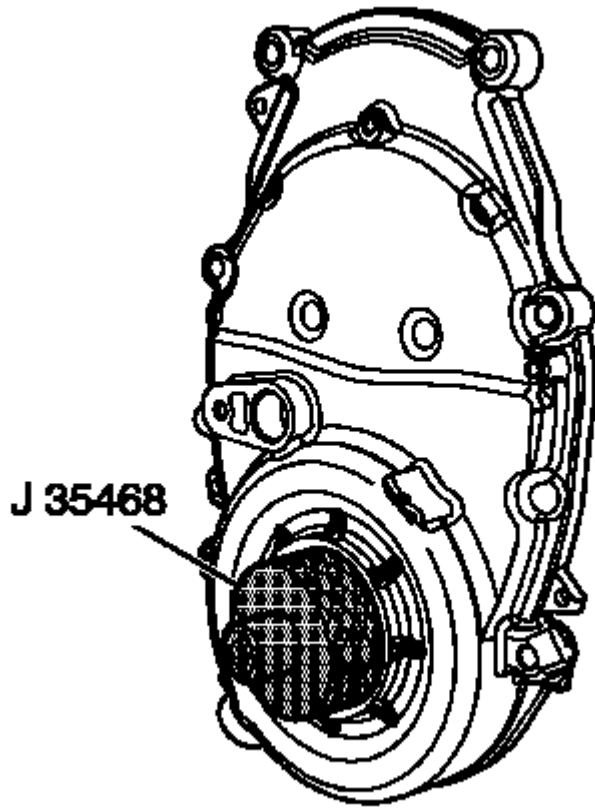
Identifying Front Seal Cover Aligner and Seal Installer
